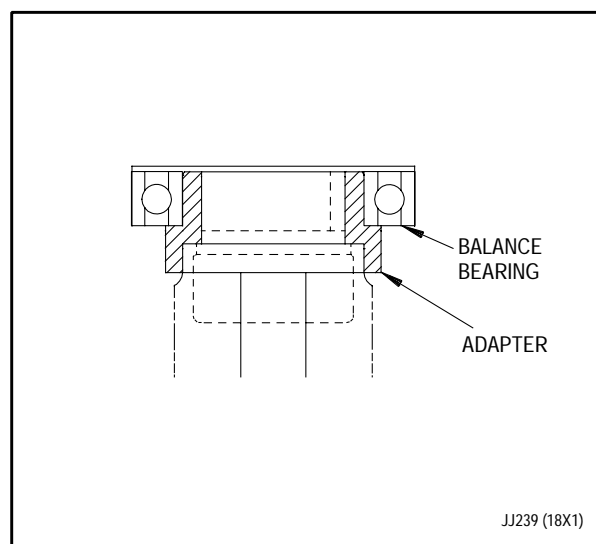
Front Compressor Drive Turbine Rotor and Stator - Installation of Balancing Tooling (Sheet 1 of 4)
